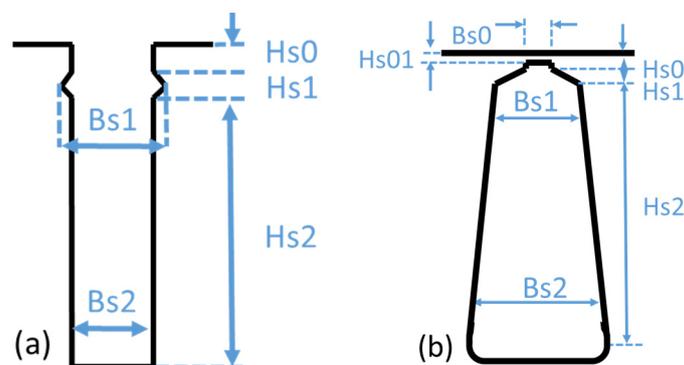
Parameters of a stator slot and a rotor slot. (a) Stator Slot dimensions. (b) Rotor Slot dimensions.
